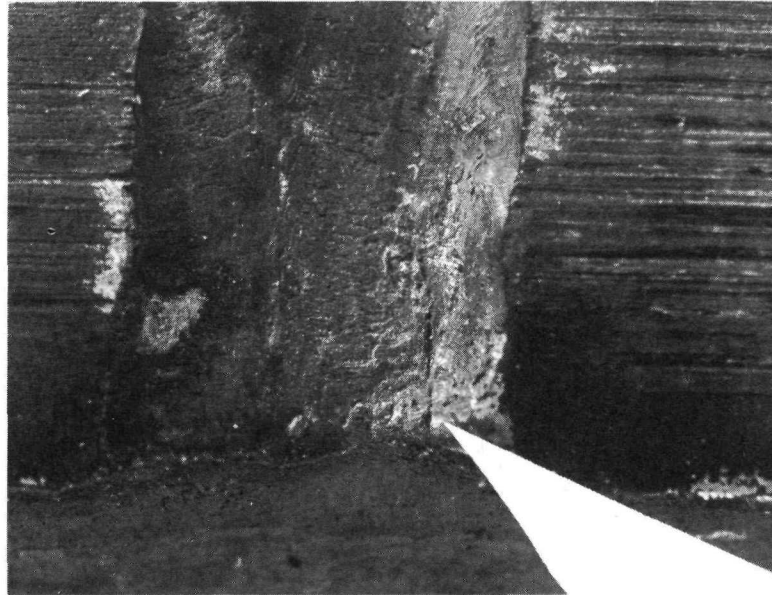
EB WELD DEFECT IN WELD RUNOFF OF RENÉ 41 SPECIMEN 2; 1/8 to 1/16 INCH MATERIAL; MAGN 17X
